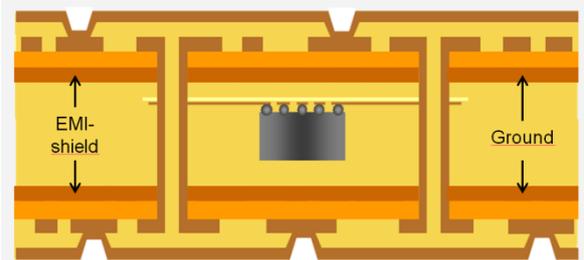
Board with buried core layer and 1 buildup layer on each side.
